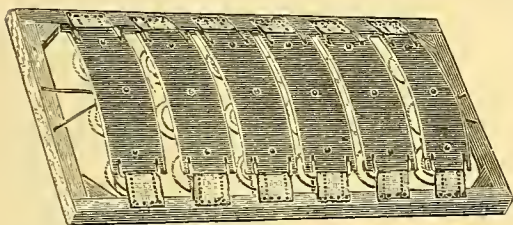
"FLEXIBLE-TOP" SPIRAL-SPRING SEAT-CUSHION, with WEBBING ENDS.
